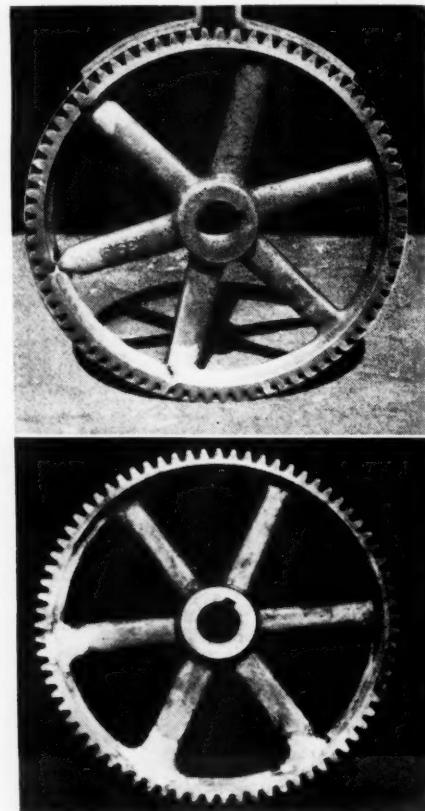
Top, showing strap-iron clamp in place on broken cast-iron gear; bottom, completed gear after bronze-welding.
